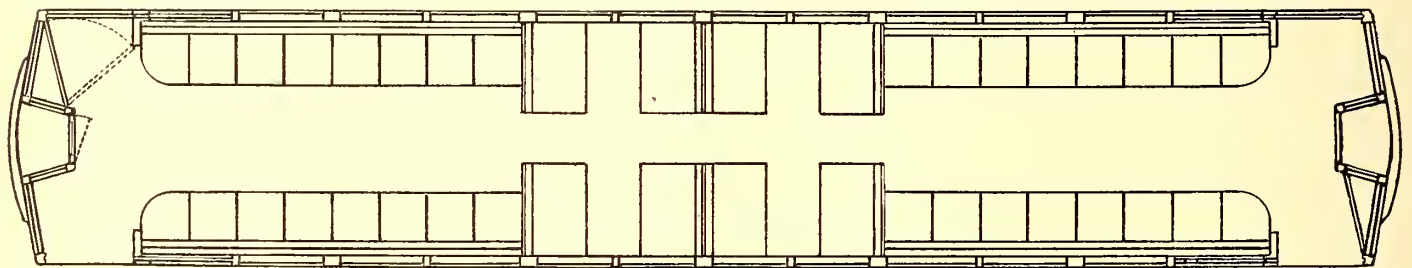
METROPOLITAN WEST SIDE ELEVATED RAILWAY, CHICAGO, 48 SEATS
